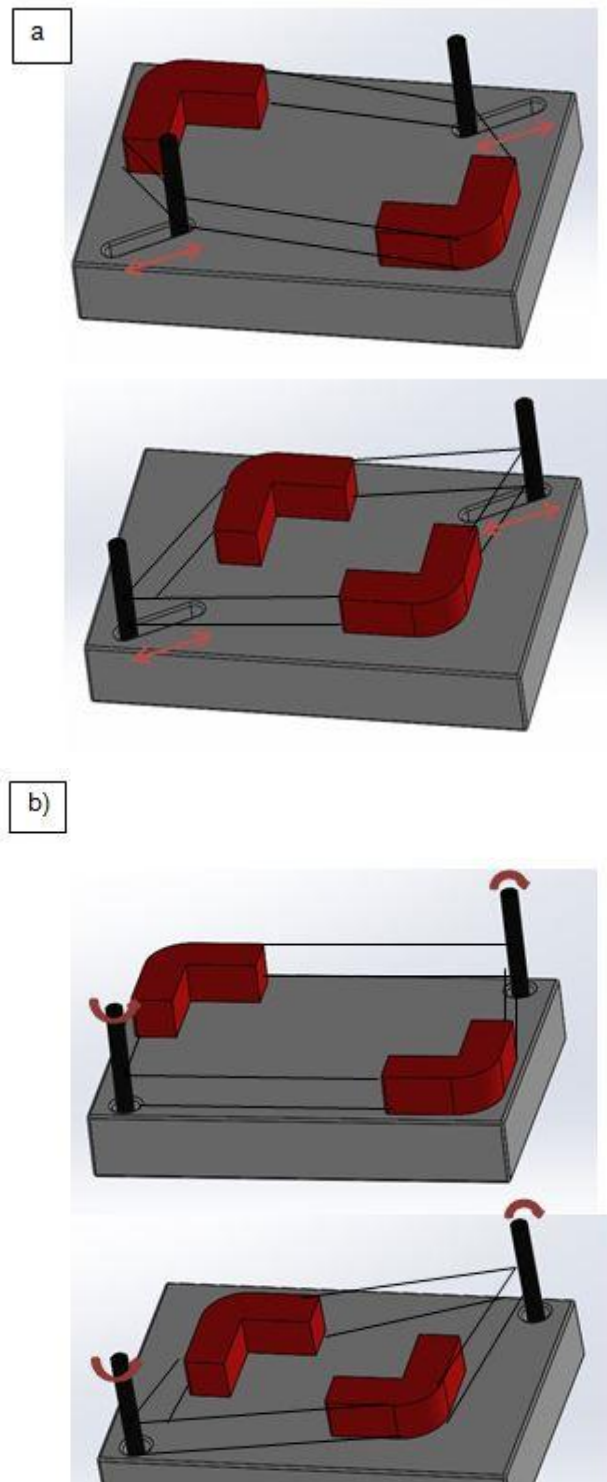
Concepts of lower part: a) using moving shafts b) using rotating shafts.
